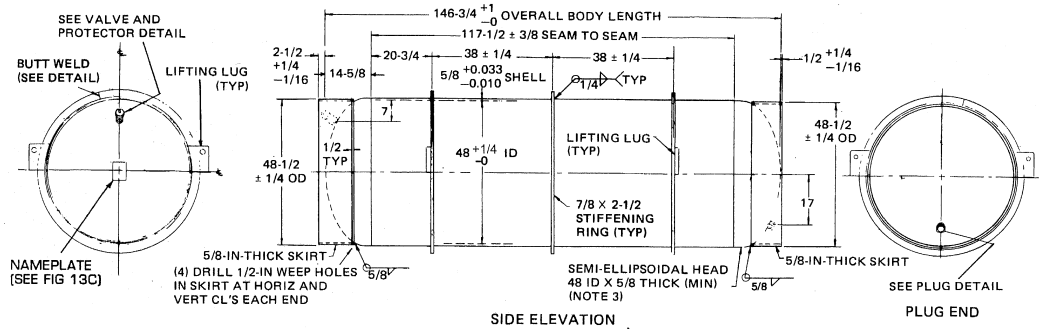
Technical drawing of a 48Y cylinder from side and end. All measure of length and errors of these are given in inches [3].
